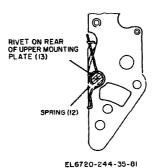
Spring location (sprang (12) from fig. 3-9).
